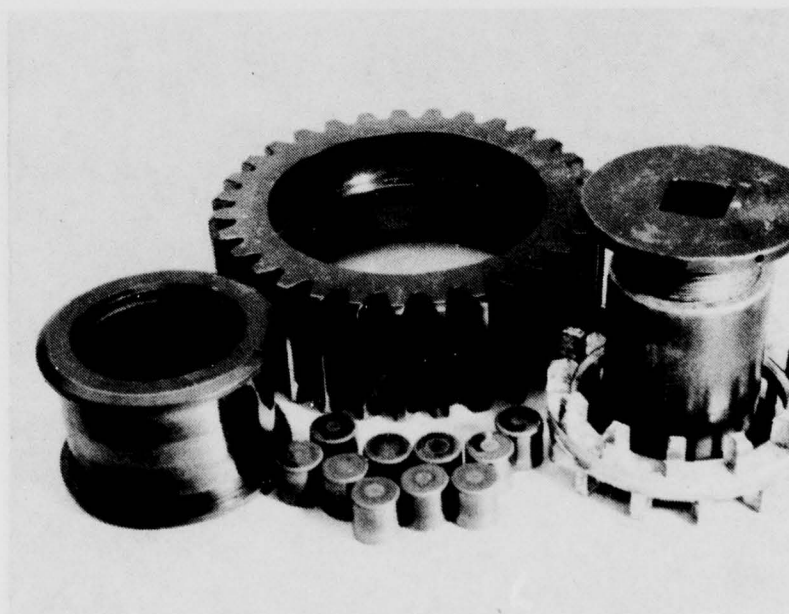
Upper planetary pinion, bearing inner race, rollers, retainer, and roller guides after 19-minute loss-of-lube test of transmission number 2.
